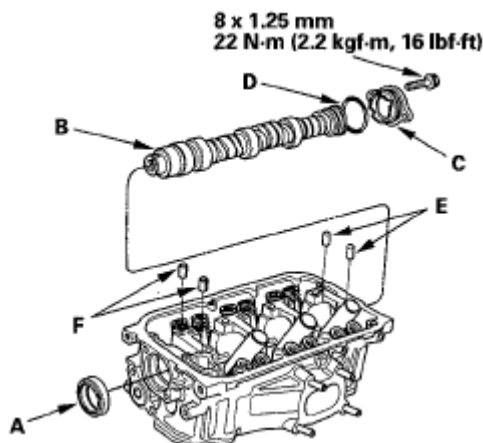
Identifying Camshaft Oil Seal With Torque Specification - Front
